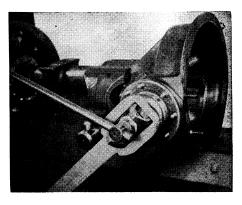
Secure yoke with holding tool and remove pinion shaft nut and washer
